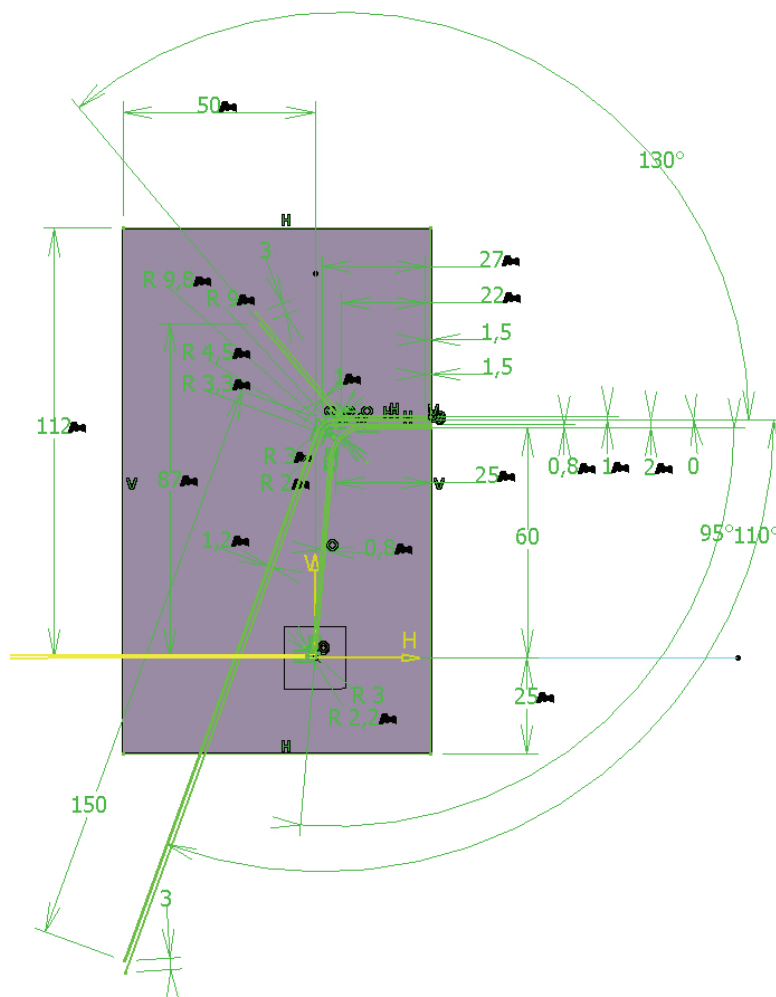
Completely dimensioned true sections (Workbench *Sketcher*, principle “Boundary box (surface)” of door bedding, sidewall outer, reinforcement C-pillar, and sidewall inner. Bent portion, reinforcement C-pillar is extended under support of dim. 150. All other segments are not extended.
